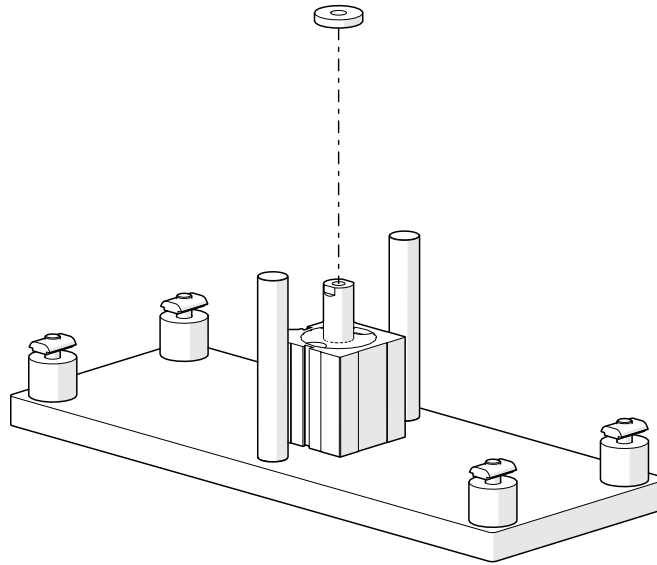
Reinstalling LLLU Top Plate Assembly and M8 SHCS
